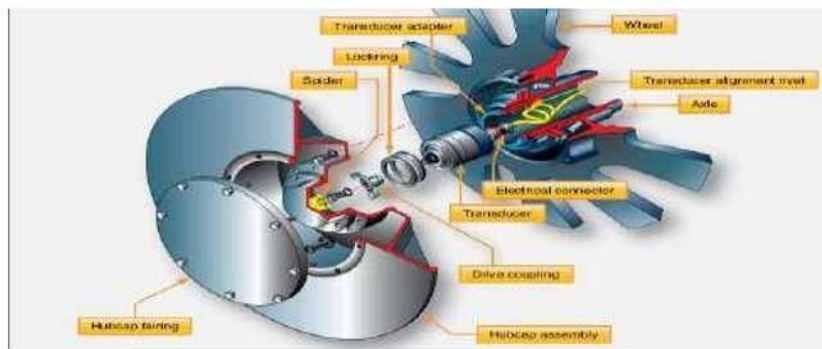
The stator of an antiskid wheel sensor is mounted in the axle, and the rotor is coupled to the wheel hub spider that rotates with the wheel.
